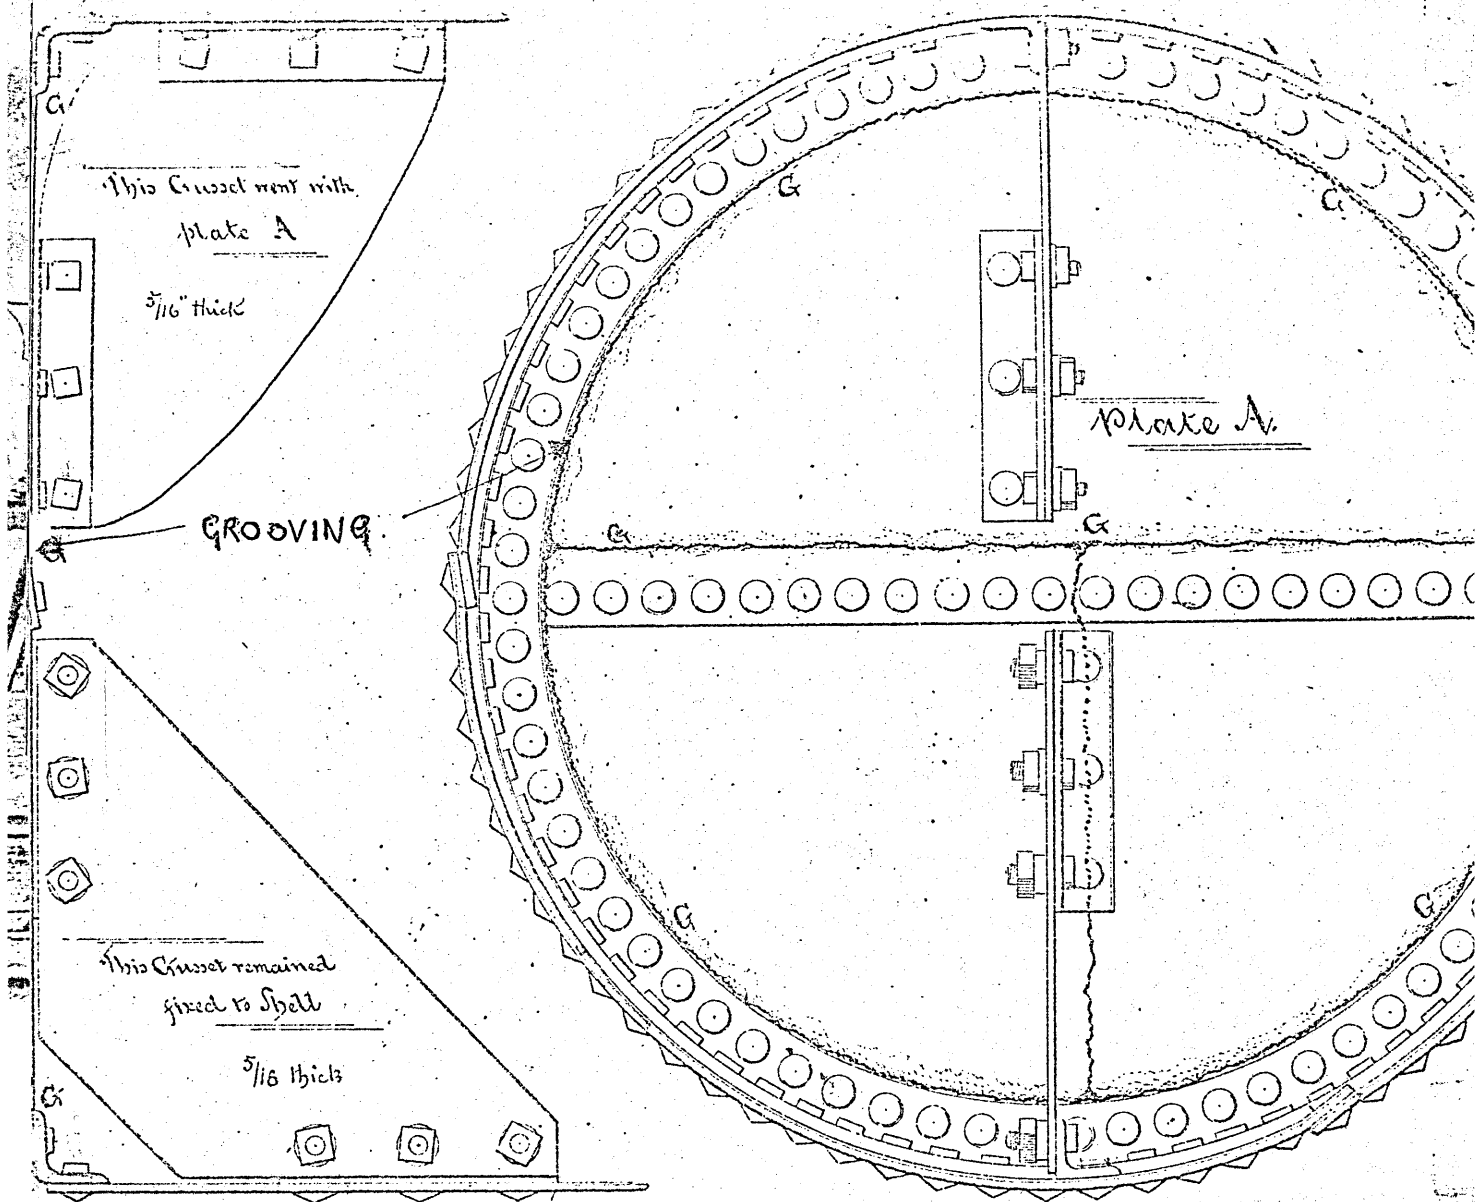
DETAILS OF GROOVING WHICH CAUSED THE 1874 BLACKBURN EXPLOSION^(A)
